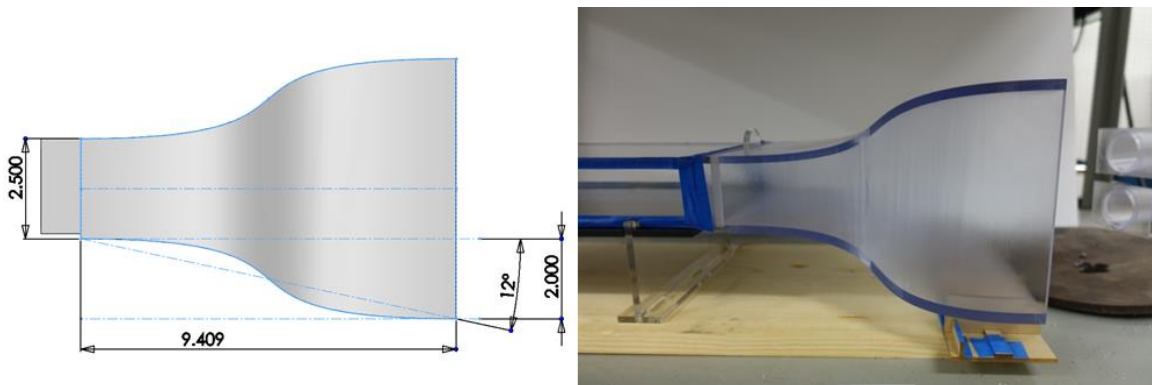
Contraction cone: CAD model (left) and 3D printed part (right)
